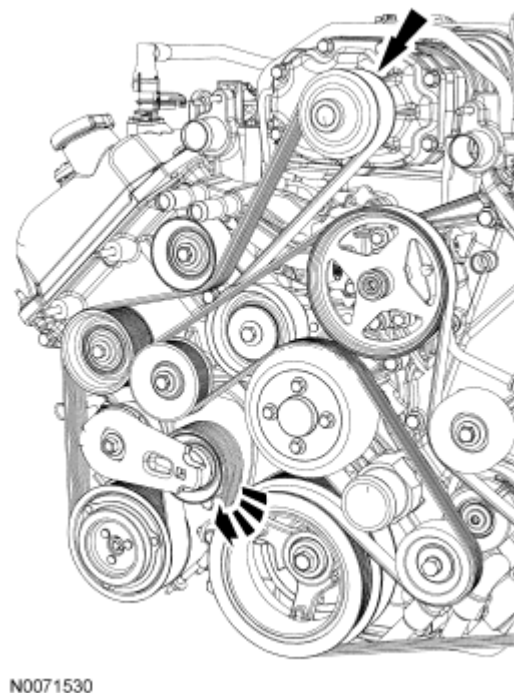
Rotating SC Belt Tensioner Clockwise & Remove SC Belt Off SC
